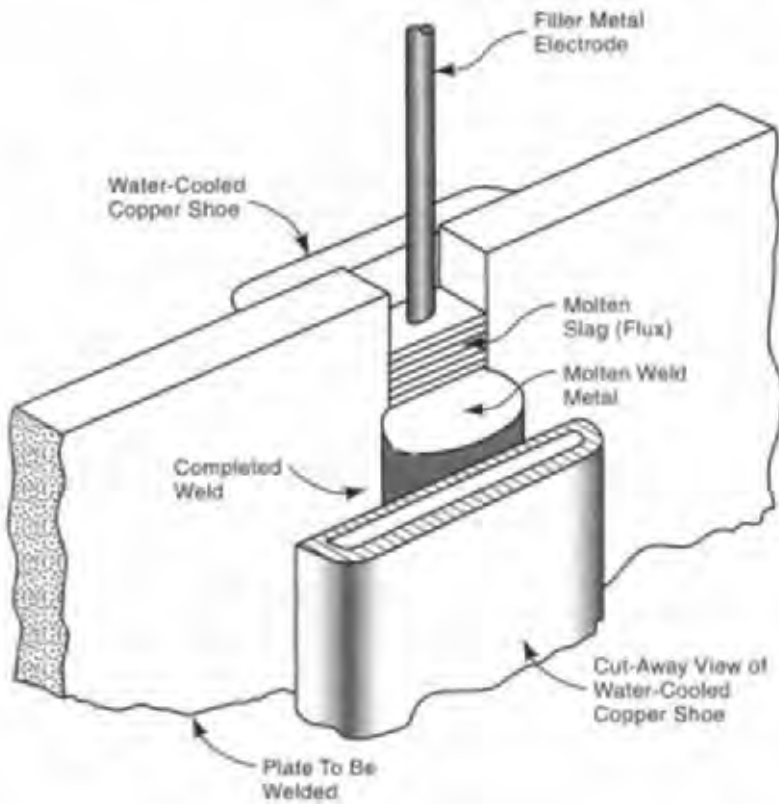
C1g Electroslag welding (ESW). Resistance of the molten slag (flux), to the current flowing from the electrode, melts the electrode filler metal and the plate to be welded. The operation moves upward as the metal melts and then solidifies. The copper cooling shoes move upward with the pool of molten slag.
